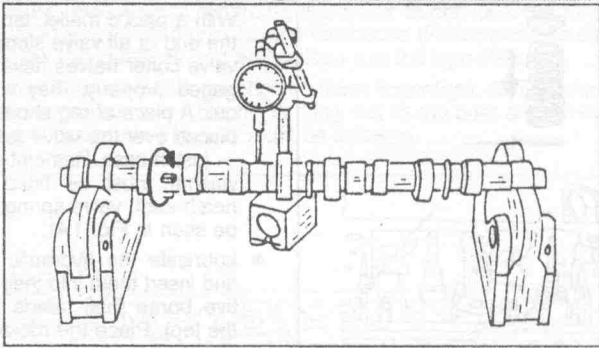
Camshafts can be checked for run-out as shown.
